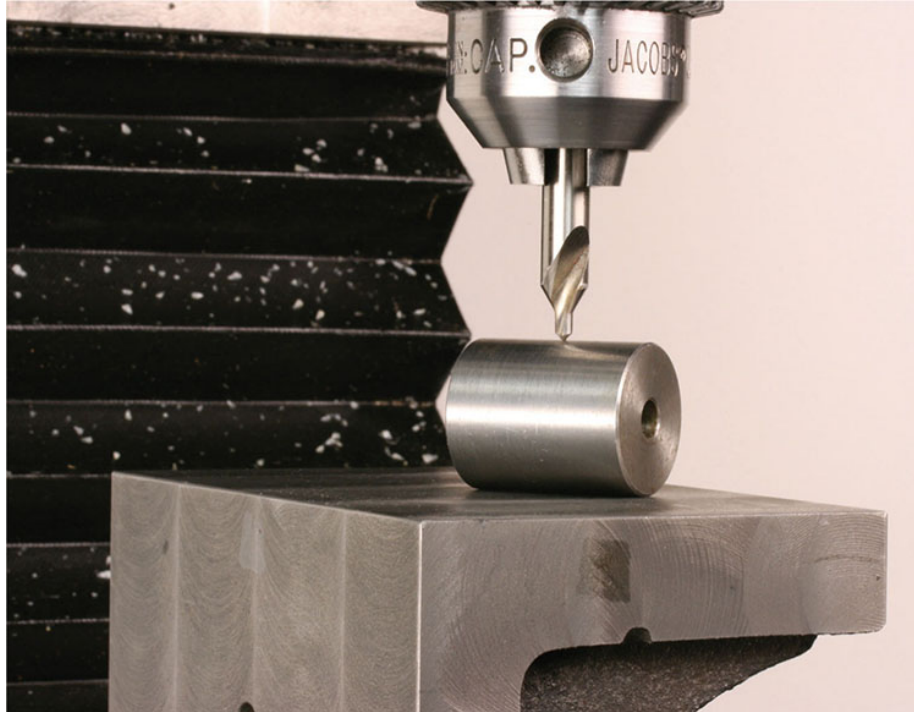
Using a roller of known diameter as a gauge to set the height of a tool.
